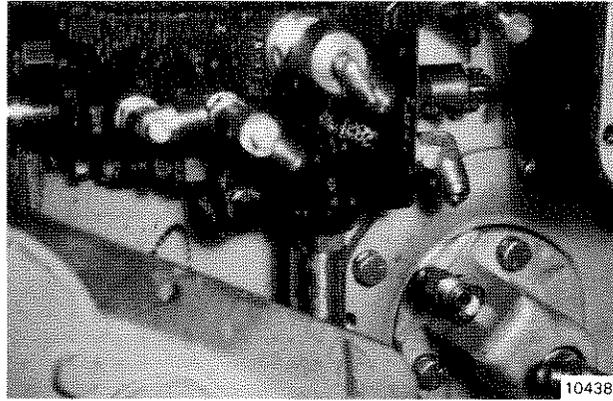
INSTALLATION OF THE BRAKE, CLUTCHES AND SHAFT (Page 1 of 4)
